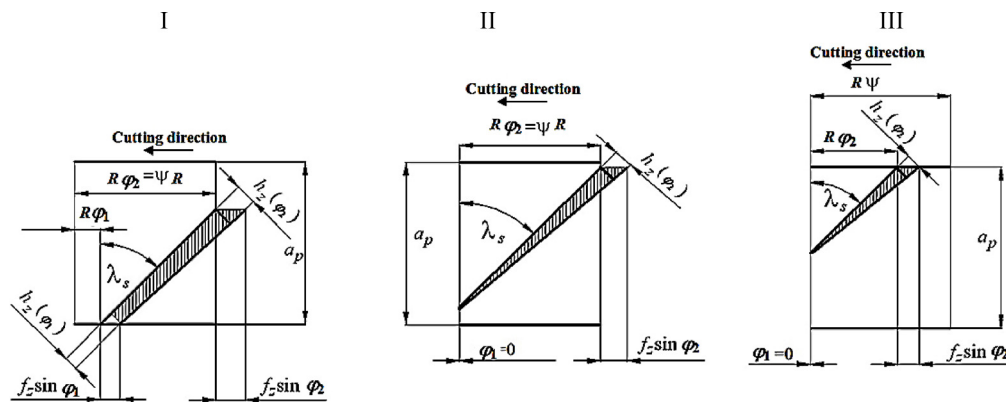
Developed view of the contact area between the tool and work piece during milling.
